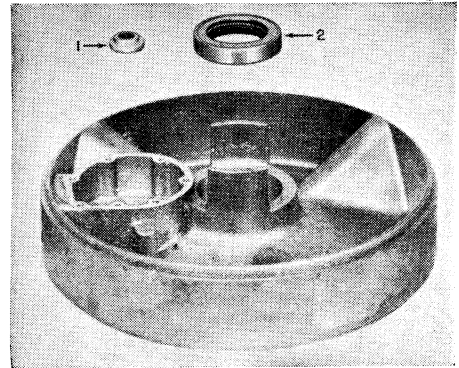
Disassembly of hydraulic control valve fitting and piston
